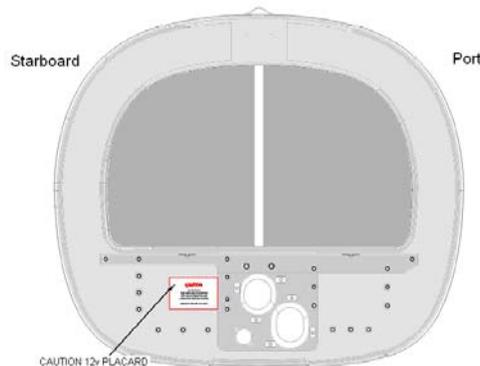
Aft side of the Mid Fuselage Bulkhead showing location of placard
